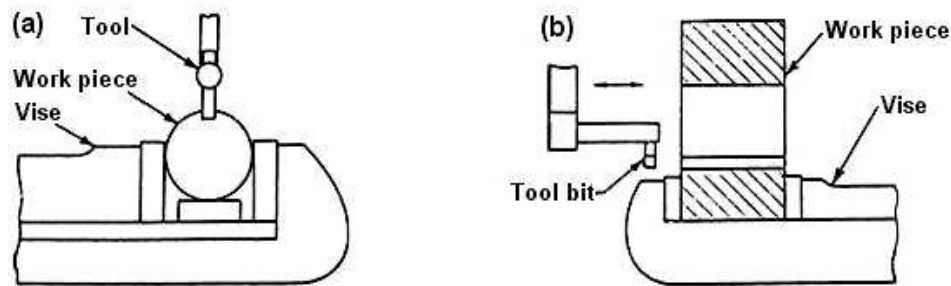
Machining of (a) External keyway and (b) Internal keyway in a shaper
